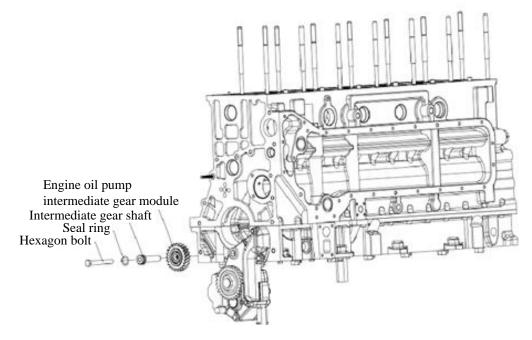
Exploded view of engine oil pump intermediate gear
